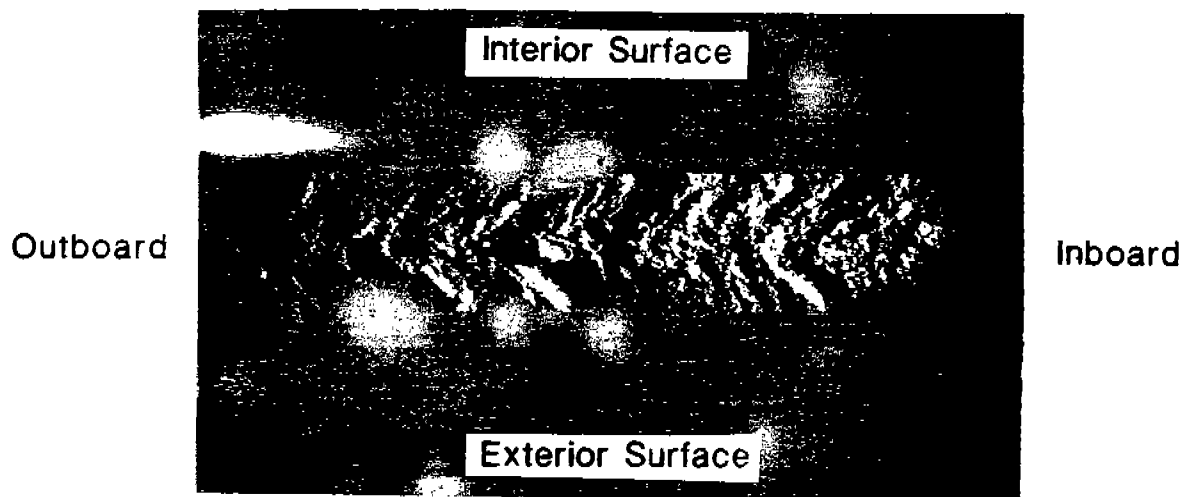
Fracture surface of Piece no. 1, oblique lighting. Somewhat more surface texture than seen in Figure 7a indicating increasing ductility in the fracture process, however no shear lip present.
